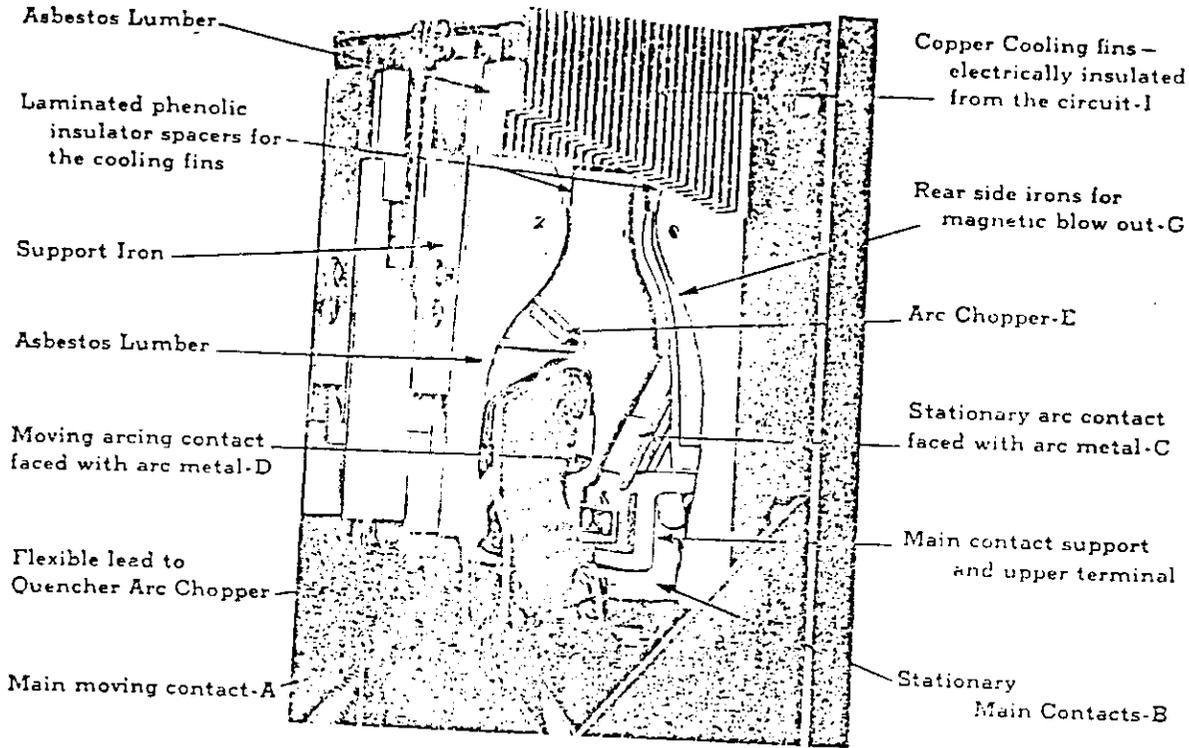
Cut away view of Arc-Mill arc quencher of the RS-15 A and RS-25 A Air Circuit Breaker. The insulated quencher cover has been removed.
